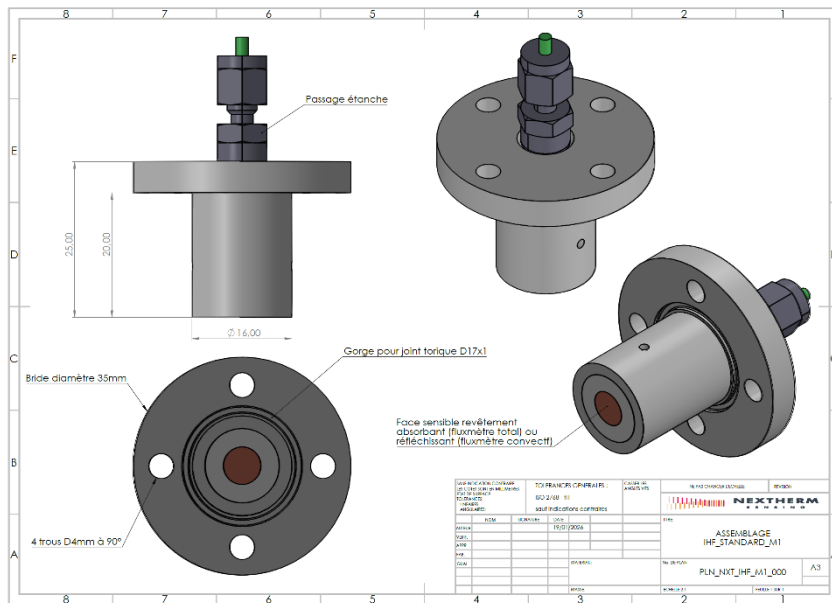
CHF heat flux sensor with four-hole flange-mounting interface at 90° (reference M1)
